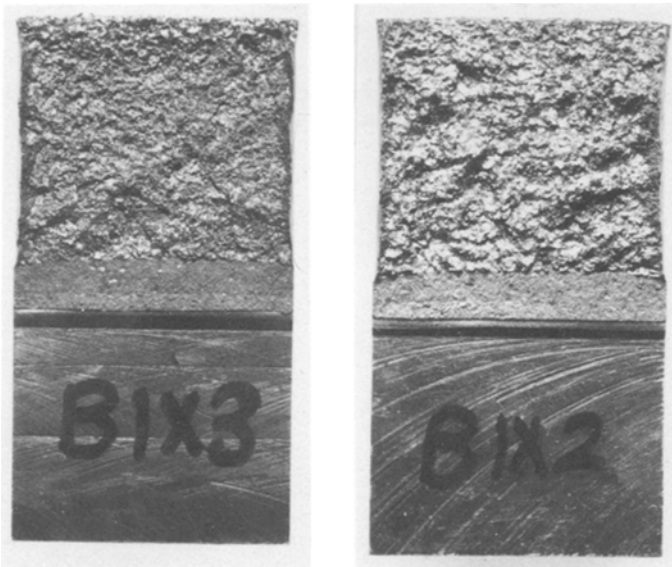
Fracture surfaces for 25 mm thick specimens of steel B.
